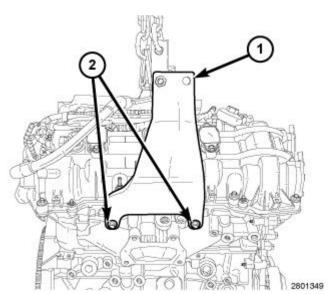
Driver Side Engine Lifting Bracket & Bolts Courtesy of CHRYSLER GROUP, LLC
